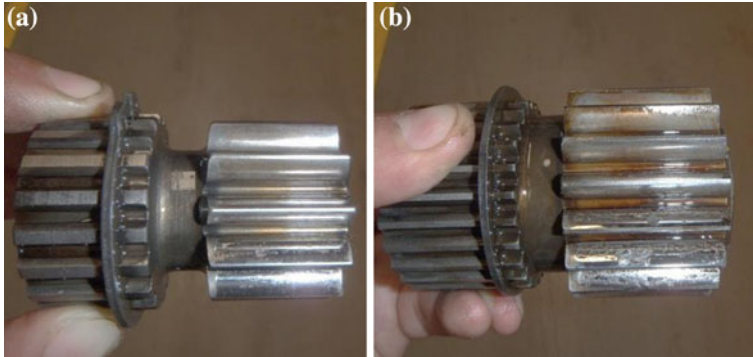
Sun gears of epicyclic gearbox. a First stage. b Second stage
